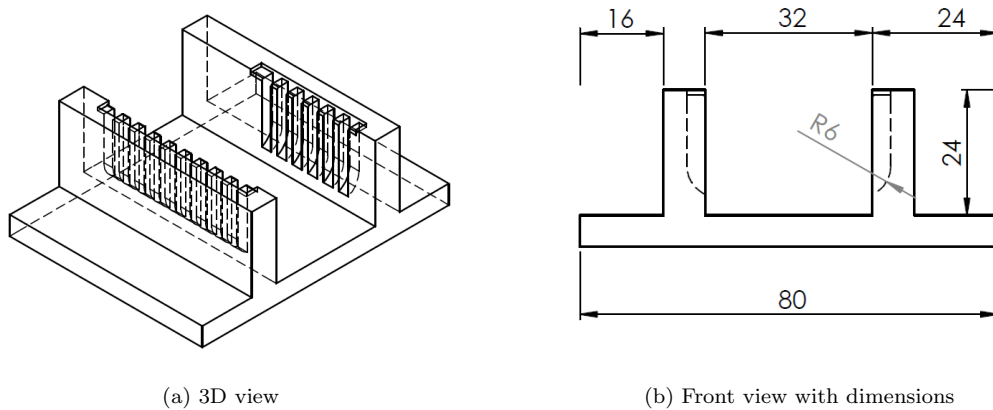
Excerpt from the technical drawing of the custom fixture (see Appendix B).
